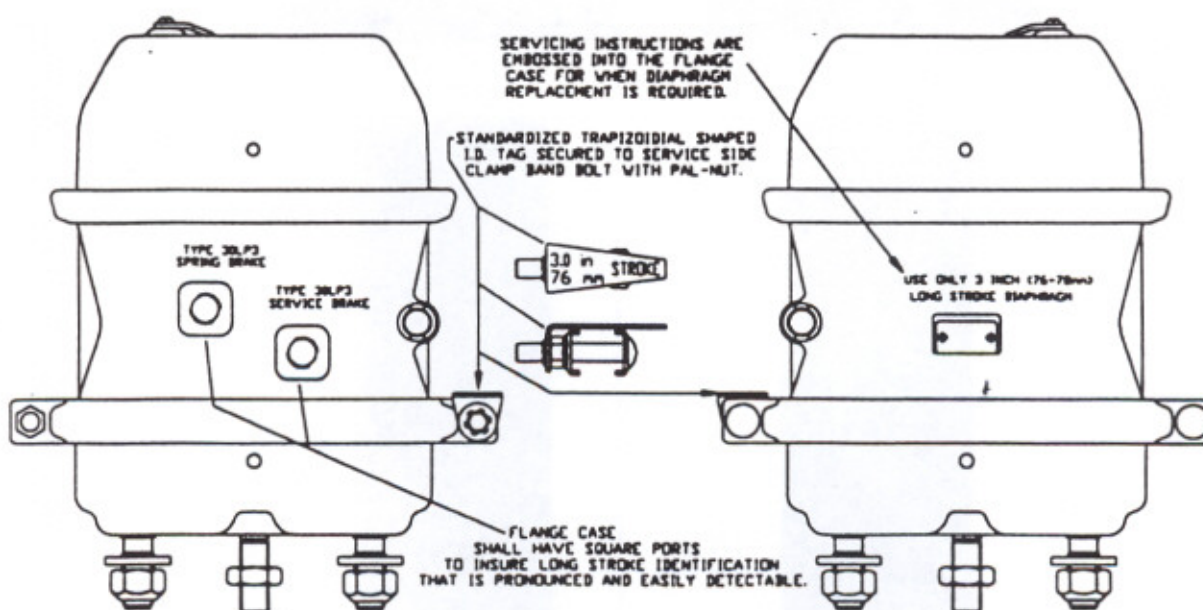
3.00 in LONG-STROKE SPRING BRAKE CHAMBER IDENTIFICATION
